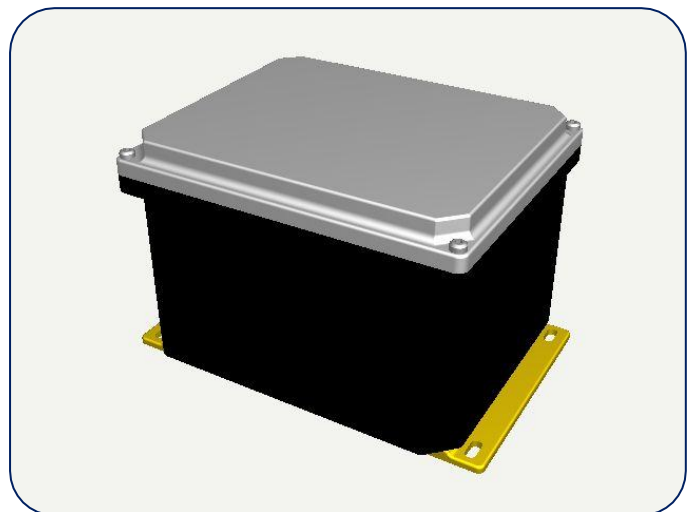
A student CAD drawing of our Integra enclosure dry housing unit
